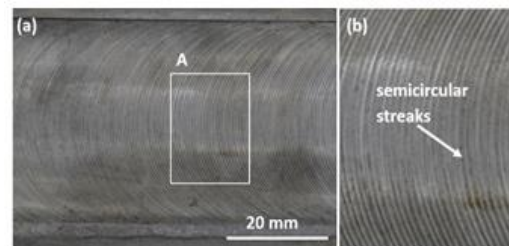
Surface texture of a friction stir welded specimen (a) general view and (b) higher magnification of the area A
